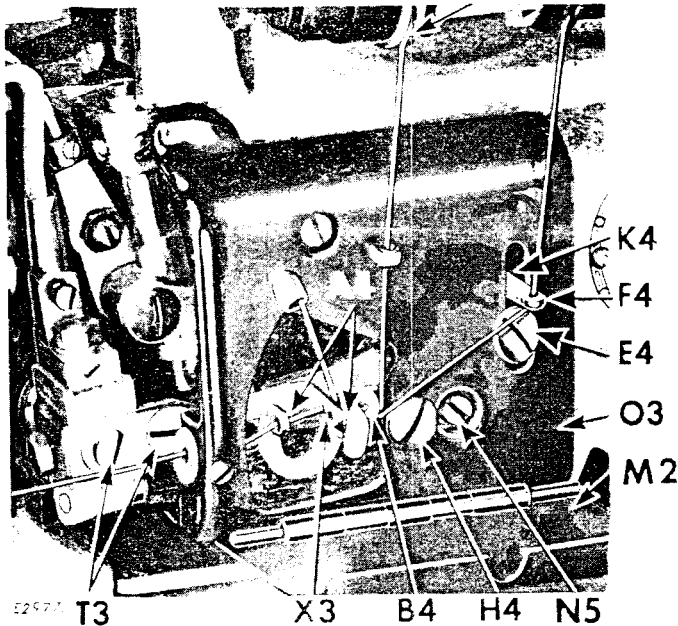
Adjustments on Take-up for Two Thread Stitch and Three Thread Tight Needle Thread Stitch
